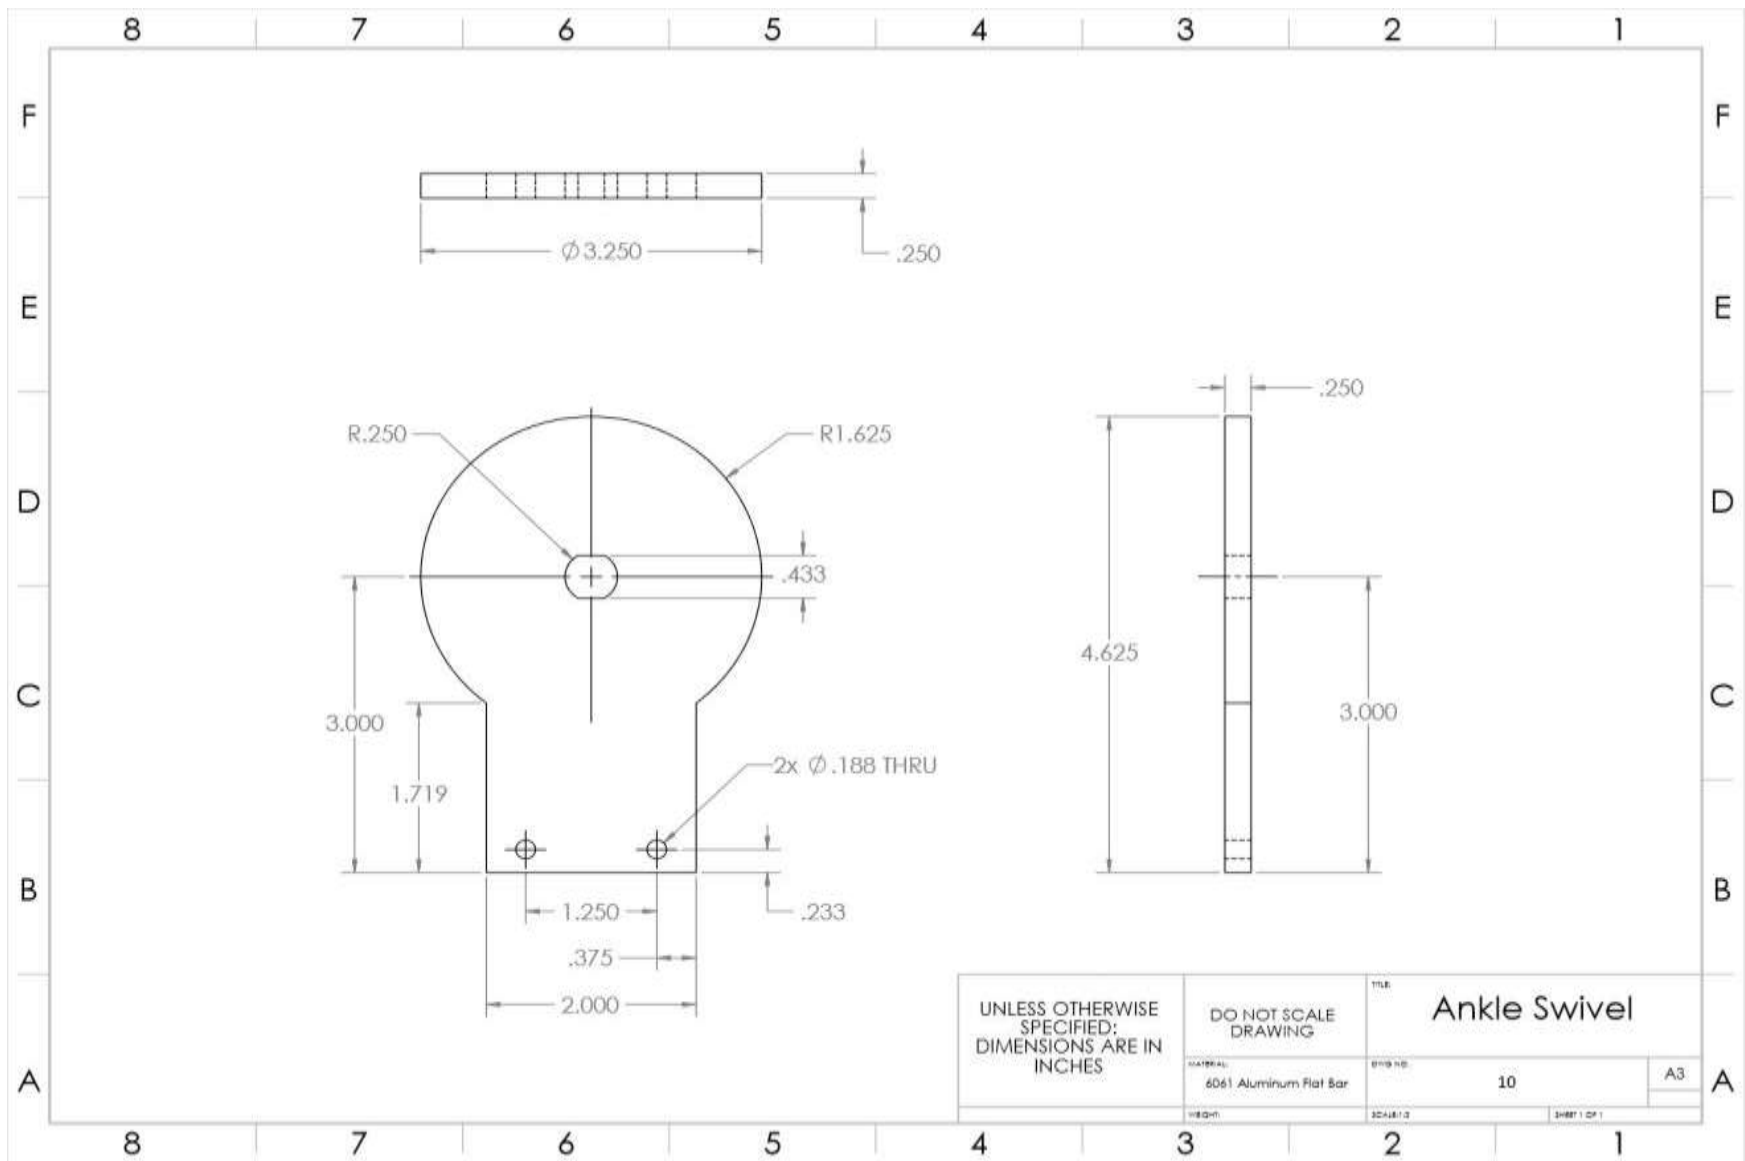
10. Mechanical Drawing of Ankle Swivel.
